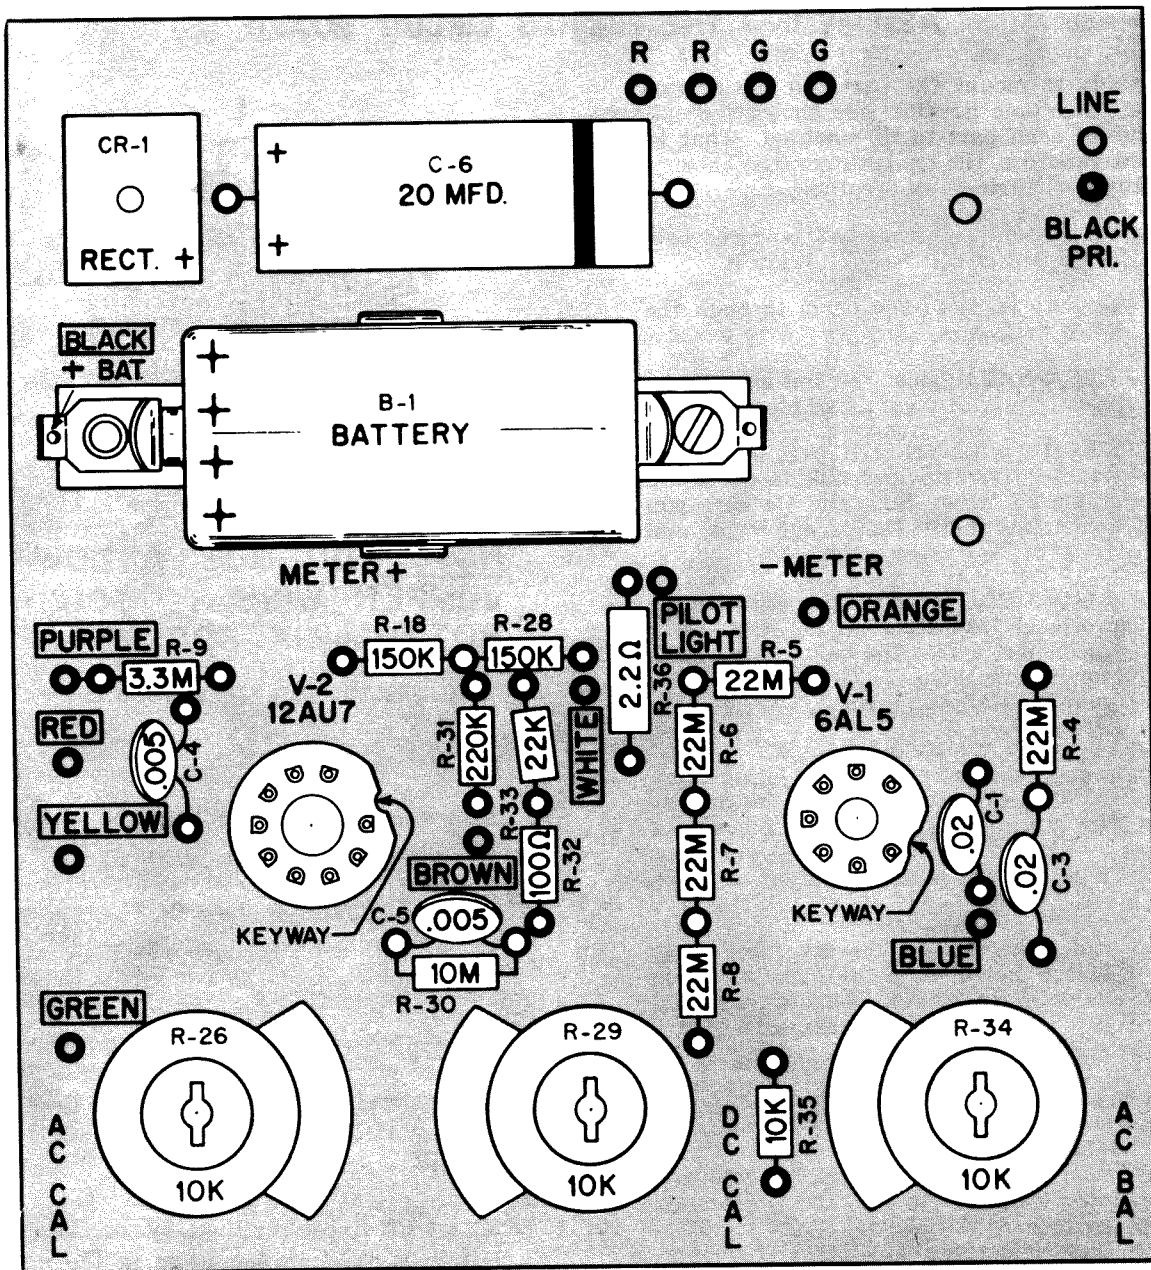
MOUNTING THE PARTS ON THE PRINTED CIRCUIT BOARD
